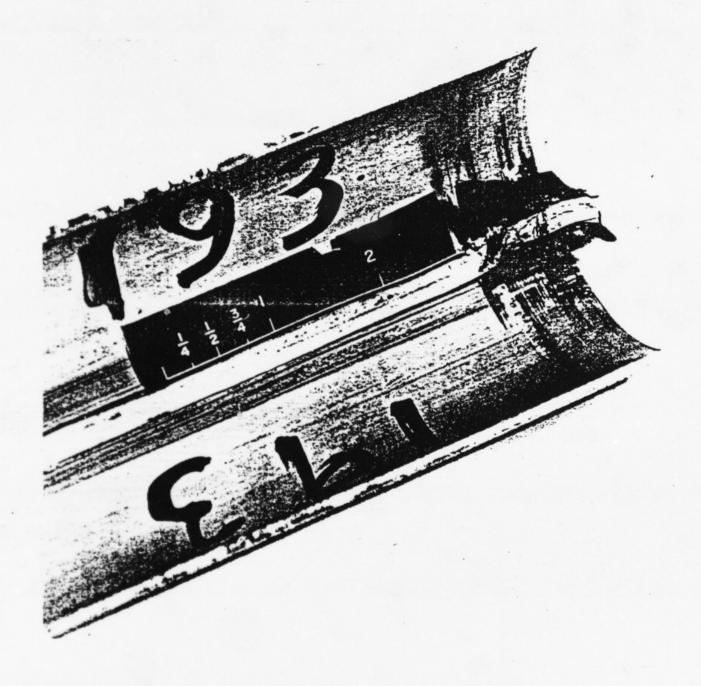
Fuze connector cable cut at mouth of warhead case assembly
